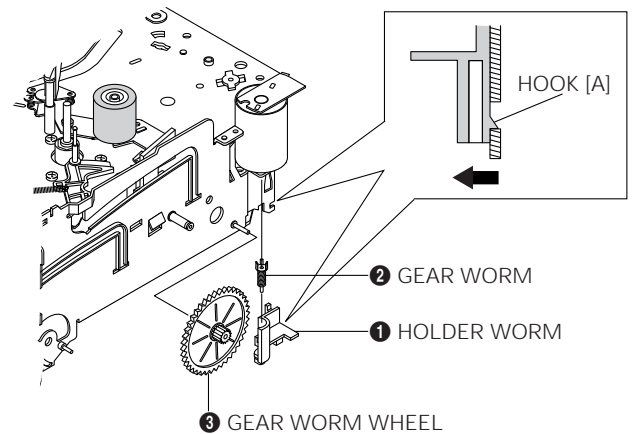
Holder Worm, Gear Worm, Gear Worm Wheel Removal
